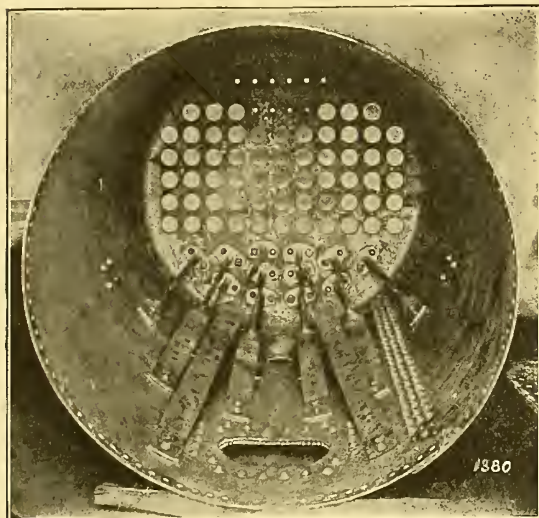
BOILER HEAD BRACED WITH DIAGONAL BRACES.
